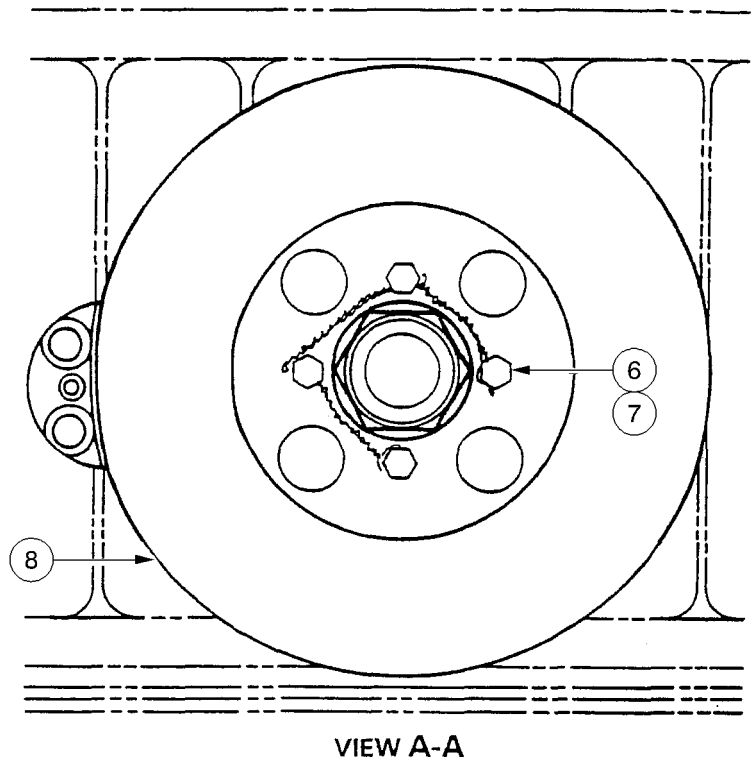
Rotor brake assembly and disc (Sheet 1 of 2)
